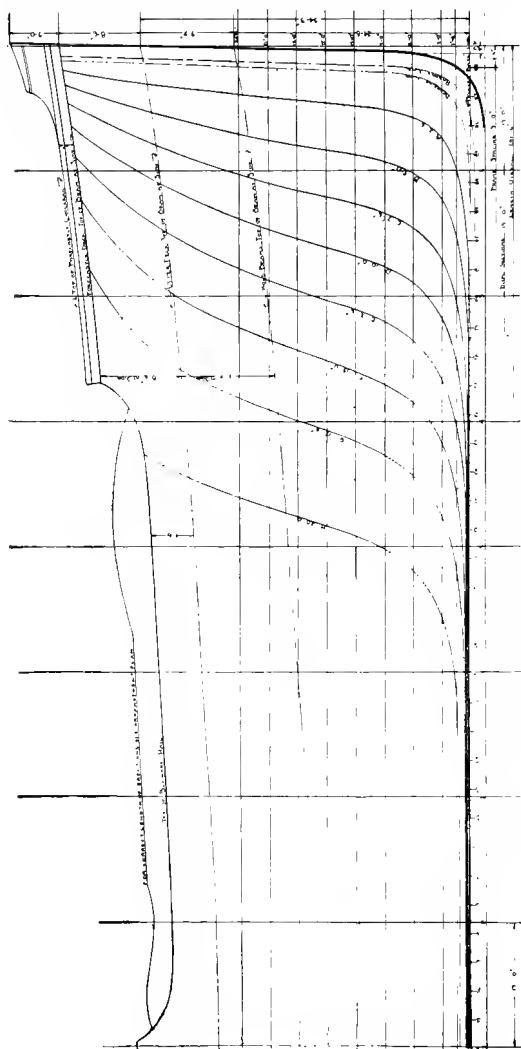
Standard Wooden Steamship—Sheer Plan—Moulded Lines—Stem.
